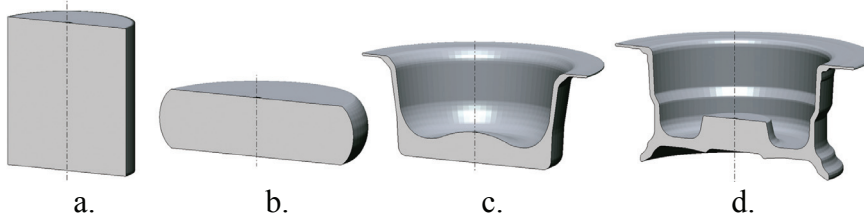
Technological operations of forging of car wheel's disc in split dies: a – initial workpiece; b – upset workpiece; c – mould blow; d – finish forging.
